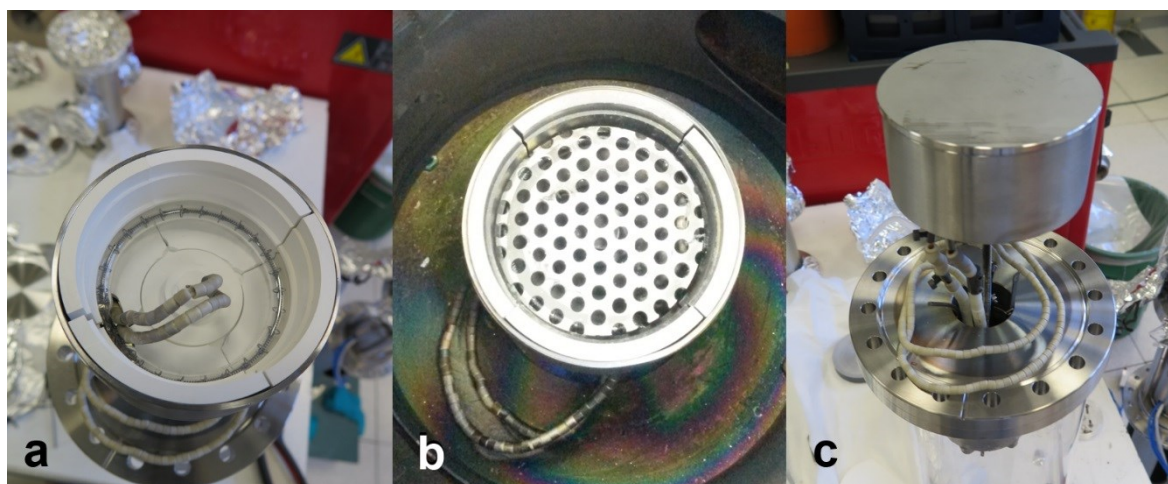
D76mm IR lamp driven vacuum brazing furnace.
